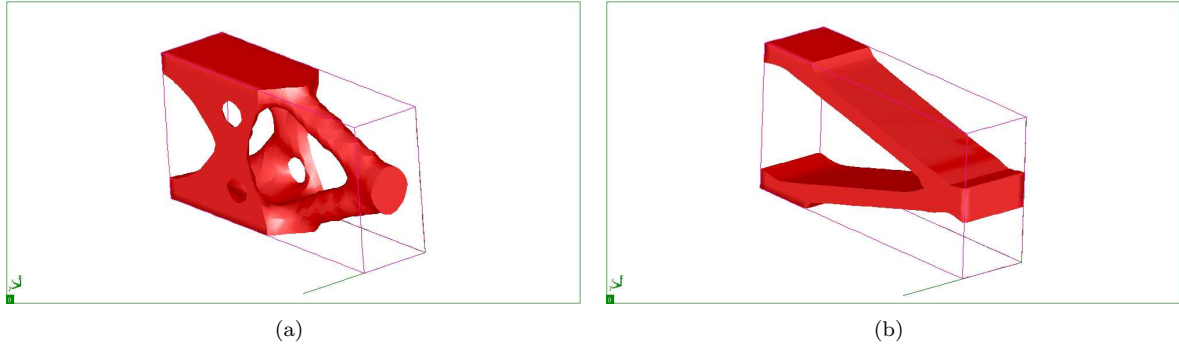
Optimized shape (a): without uniform cross-section; (b): with uniform cross-section.
